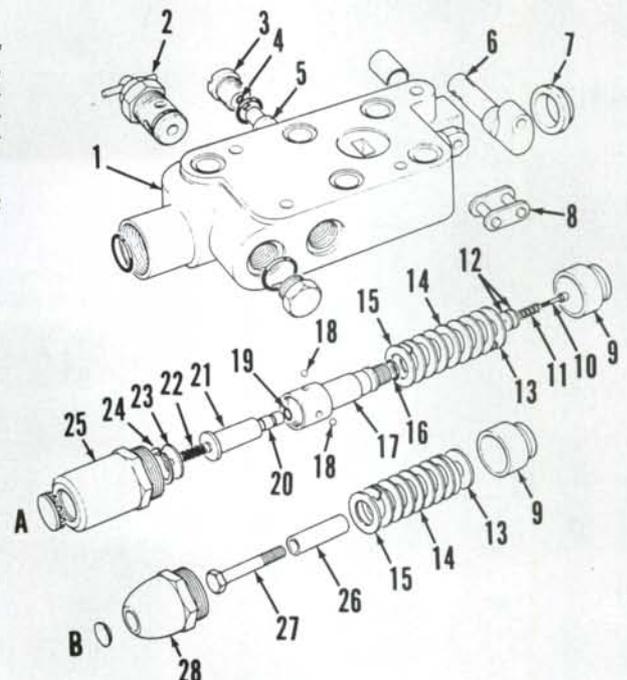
Exploded view of air relief valve used on models equipped with front mounted hydraulic pump.
